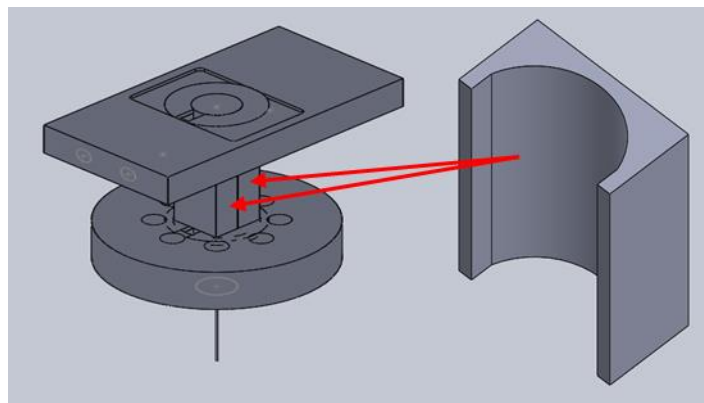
Peltier thermoelectric cooling system assembly consisting of aluminium jacket
